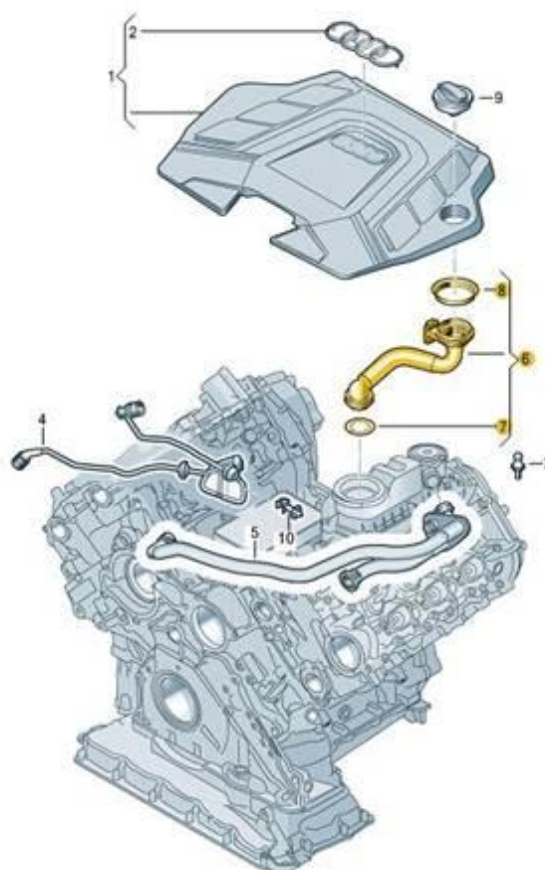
Oil fill extension tube (see possible cross-threading at number 7 on diagram).
